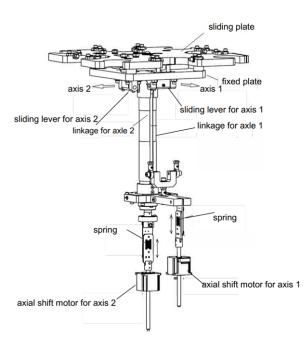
Axonometric assembly drawing of the balancing mechanism.
